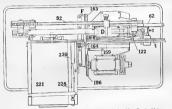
(Fig. 1. in patent abridgment.) Grant-Legros-Maw line-justifying machine. Plan.
